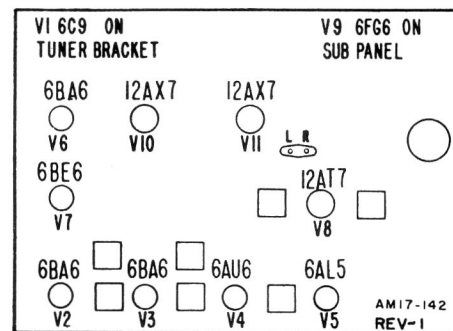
Tube Layout J103X Tuner and Amplifier Chassis
